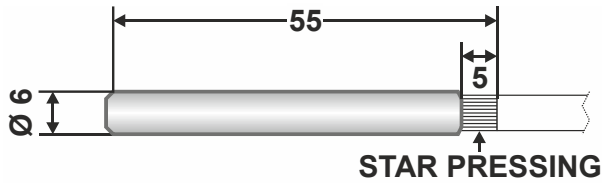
Dimensions of the cable-type bulb sensor in mm
